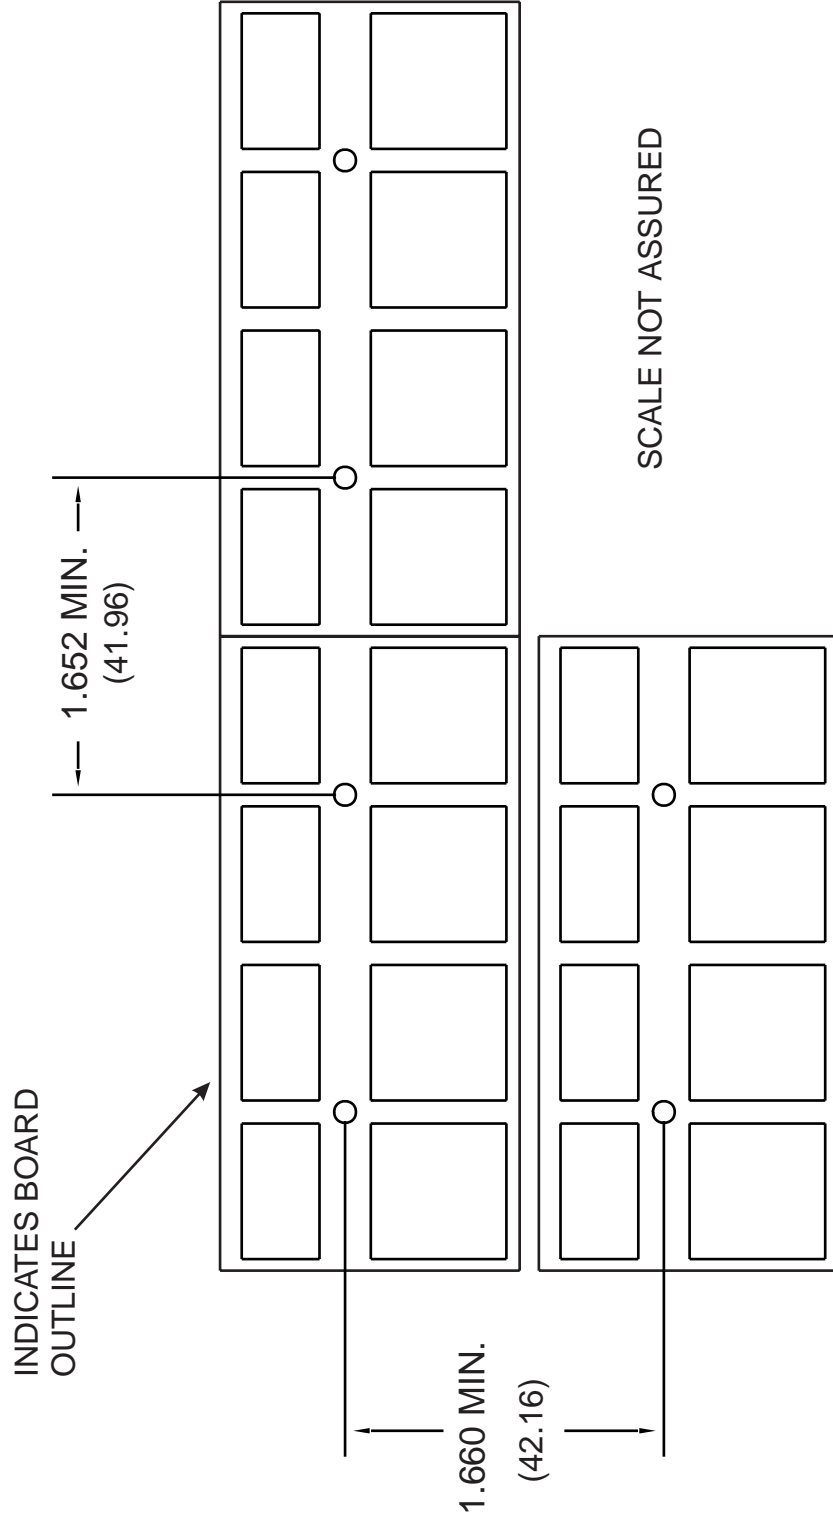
Minimum Hole Spacing Requirement for Side by Side and Above/Below Key Board Placement (Scale not assured)
